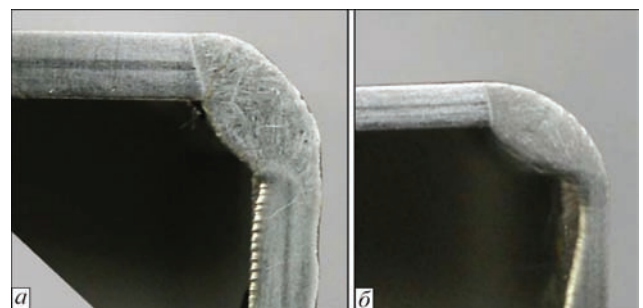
Macrostructure of fillet welded joint of stainless steel AiSi 304 of 1.2 mm thickness (a) and AiSi 201 of 0.8 mm thickness (b)
